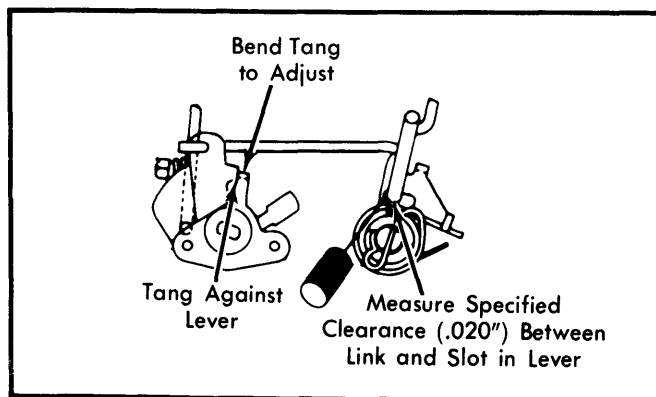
Adjusting Secondary Throttle Closing Linkage
